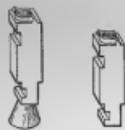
The Oddur type-bar machine. Front view of mould. Scale: twice full size.
